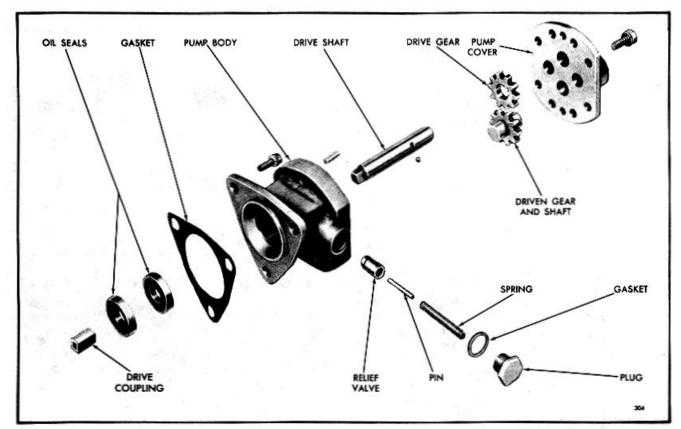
Fuel Pump Details and Relative Location of Parts
